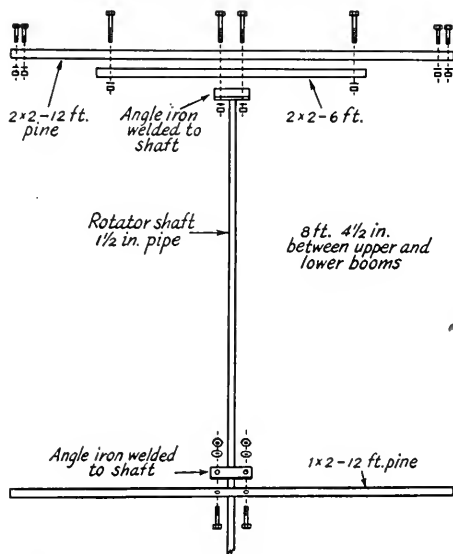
Assembly of booms and rotator shaft. All bolts are ¼ inch.
